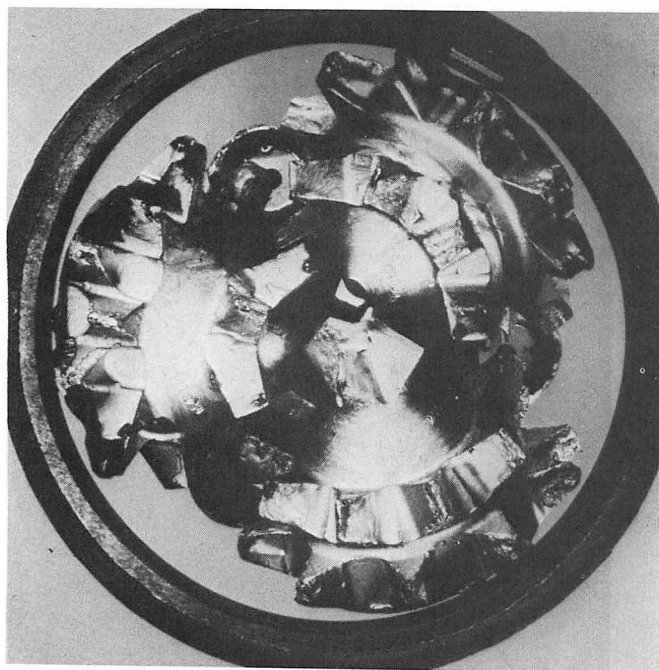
Bottom view of three-cone, soft formation rock bit with ring gauge to show how well three cones fill the hole being drilled. [Gauge diameter 200 mm (7 ⁷/₈ in.)]
